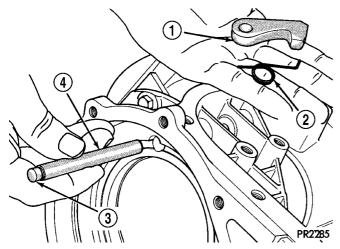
Parking Pawl, Return Spring, and Pivot Shaft
